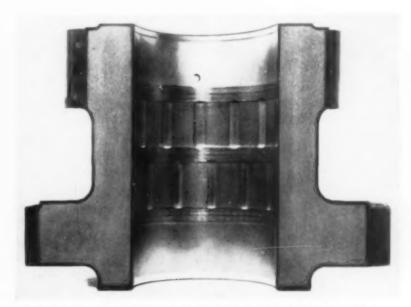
Dirty Oil Caused Excessive Wear in Roller Paths; Finally the Case Was Worn so Thin it no Longer Could Carry the Impact Loads, and the Rollers "Hammered In"
